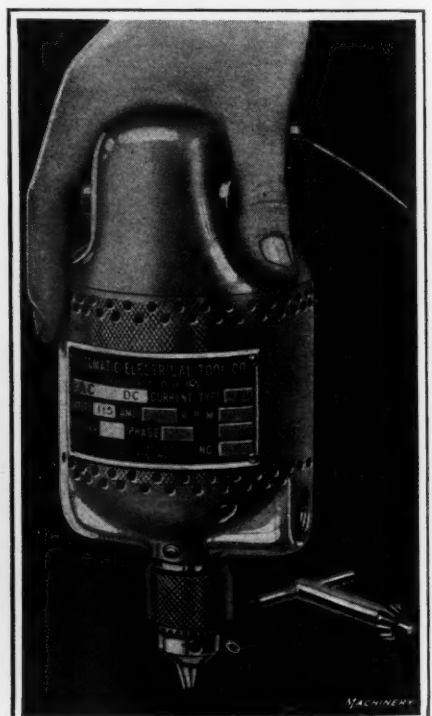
Automatic Electrically Driven Airplane Drill sold by George C. McKay
